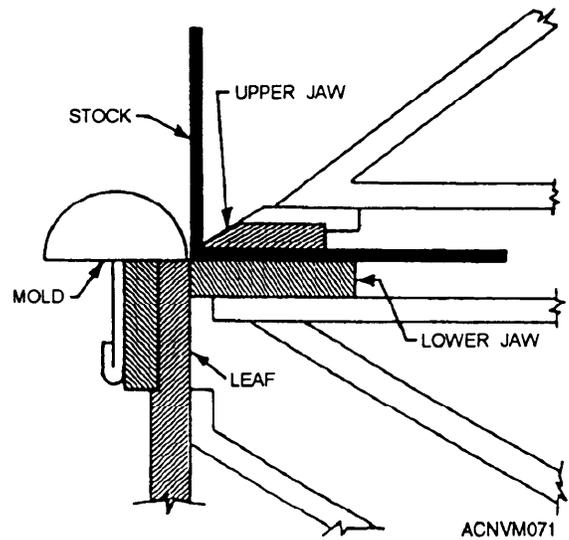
Work ready to be formed over mold on standard cornice brake.
